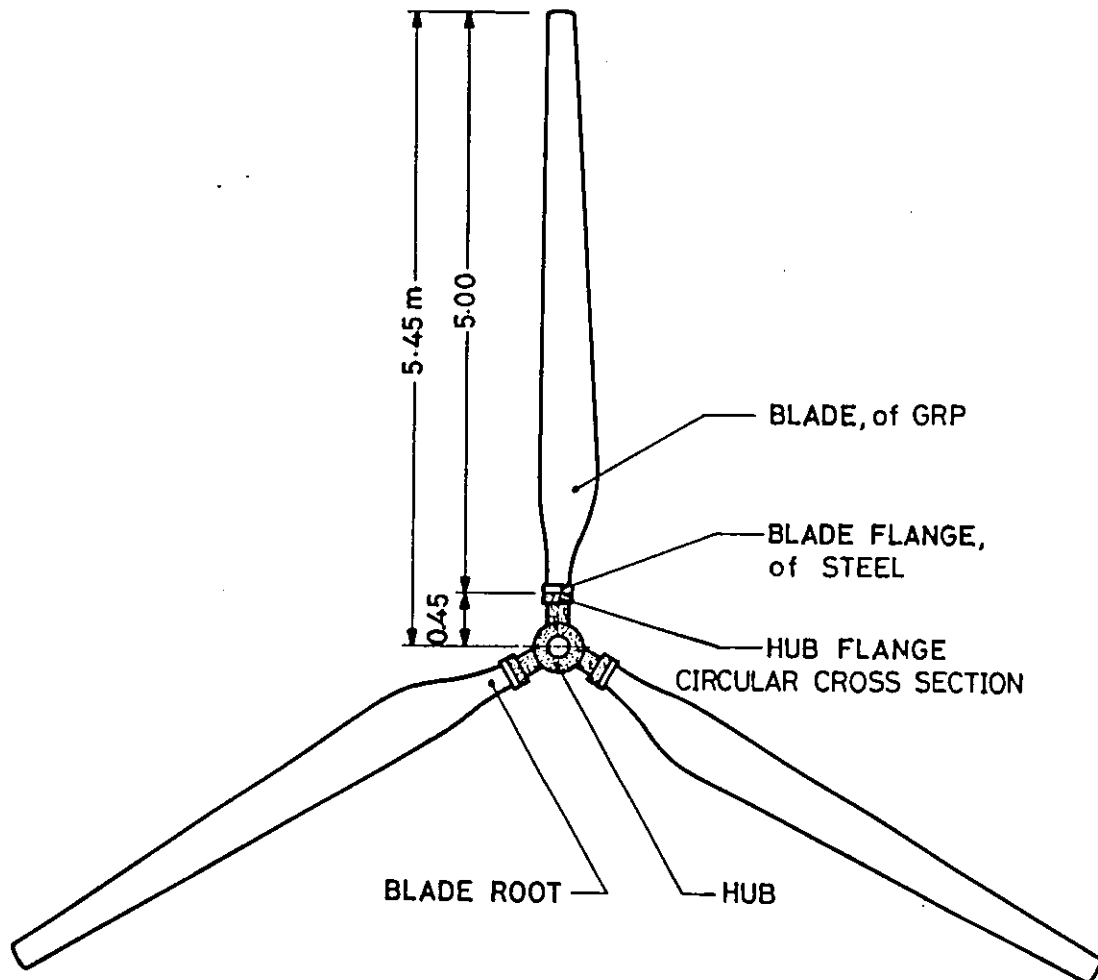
Three Blade Rotor Assembly Showing the Hub and Blades.
